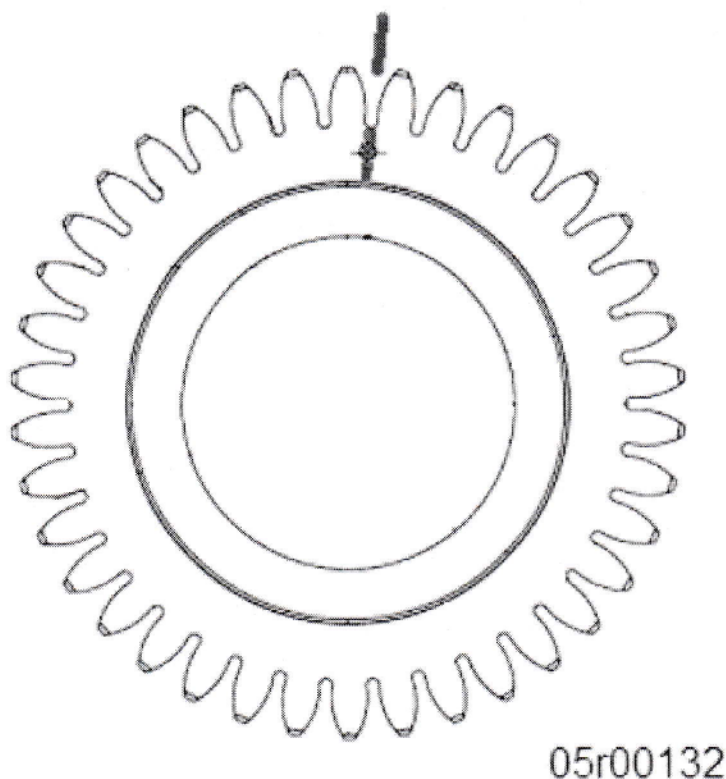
, Align Marks on Fuel Pump Gear and Fuel Pump Housing.
